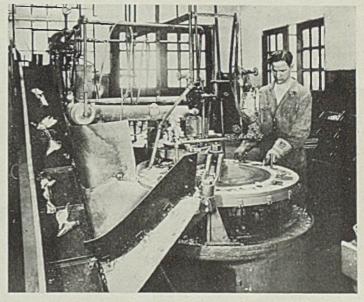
(left)—Battery of four grid-casting machines which cast the rough grids for storage batteries. The machines are of the duplex type; the molten metal flows into a ladle which empties it automatically into the molds. Fig. 2 (above)—This machine molds parts such as connectors and plate straps. Waste is carried up an inclined conveyor to the reclaiming furnace
